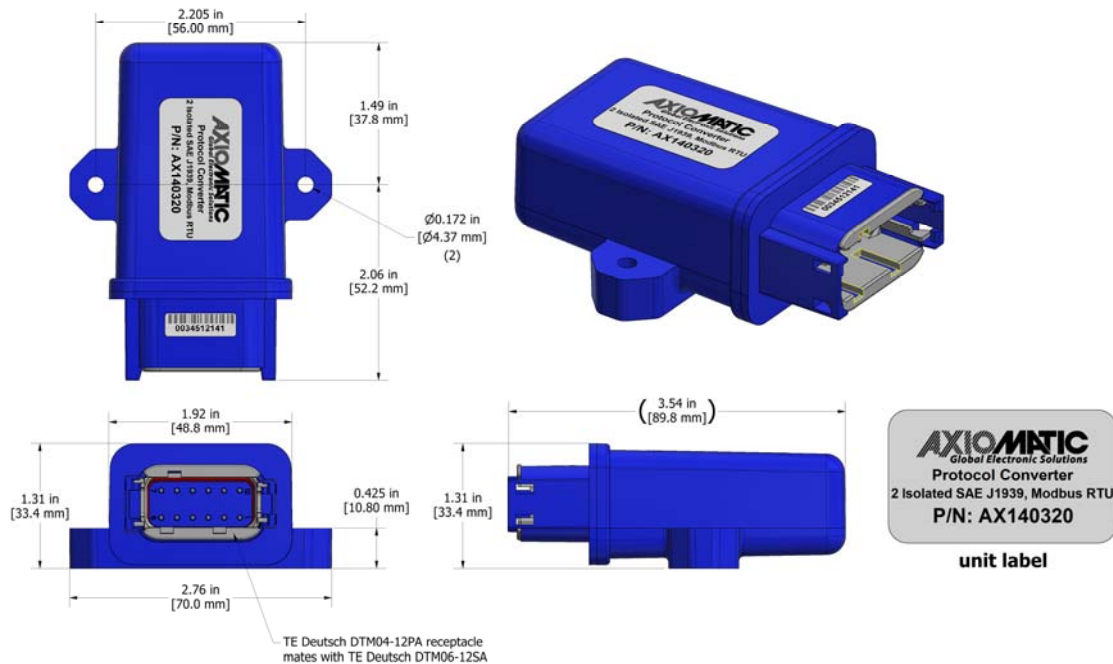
Dimensional Drawing (AX140320, AX140321 and AX140322 have the same dimensions.)
